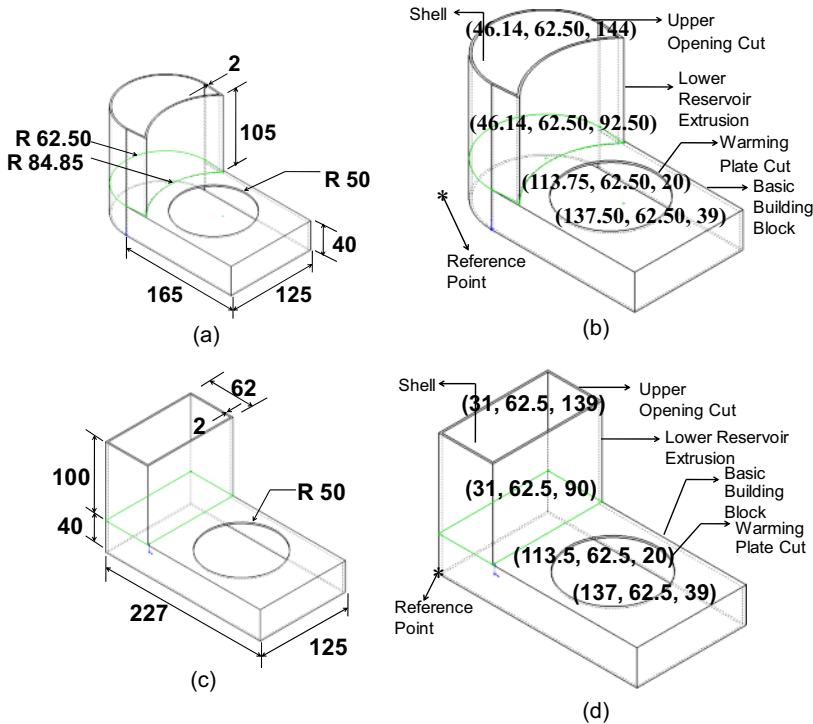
Two coffeemaker lower housing component models showing physical dimensions of lower housing 1 and 2 (a, c) and geometric center positions of the lower housing 1 and 2 (b, d)
